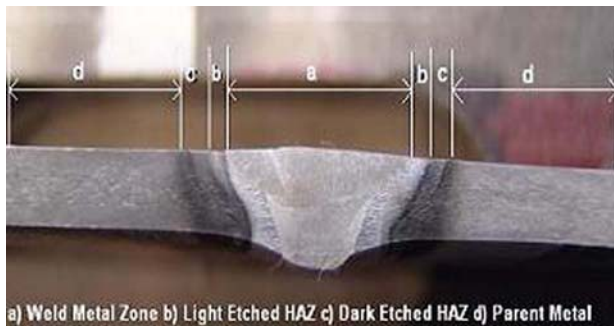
Macrostructures produced in as-welded specimen
